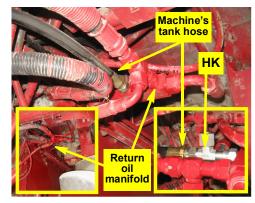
with insets: Run-tee at tank port, machine's tank hose reconnected
